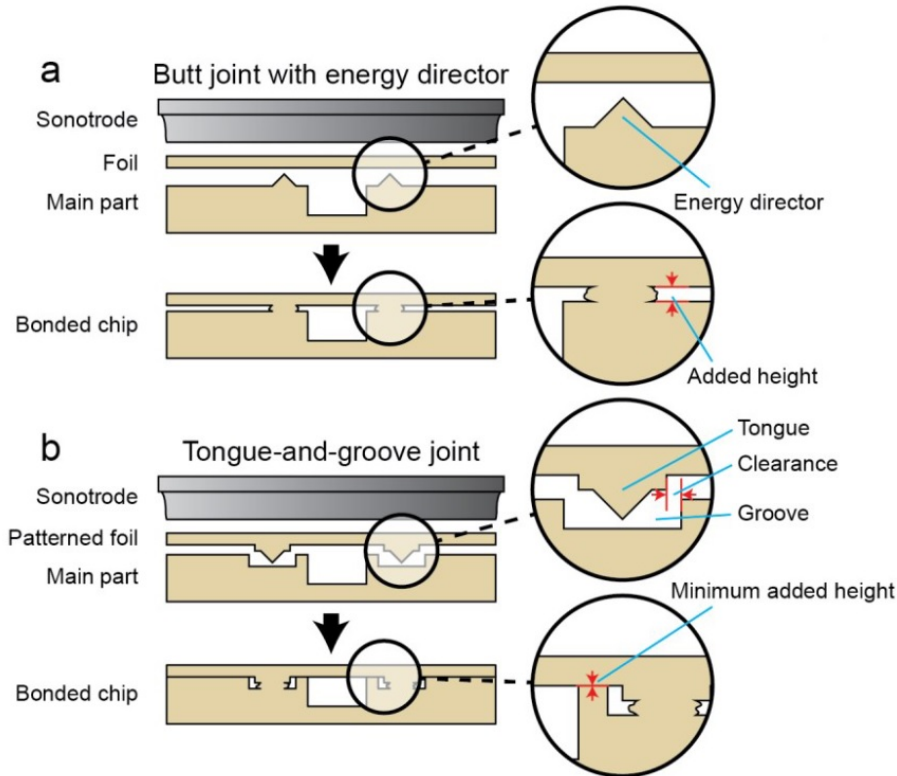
Two different energy directors for ultrasonic welding. (a) Butt joint with energy director, on the right in closer view with added height after bonding. (b) Tongue-and-groove joint where the material is captured in the groove after bonding. Figure taken from [34].
